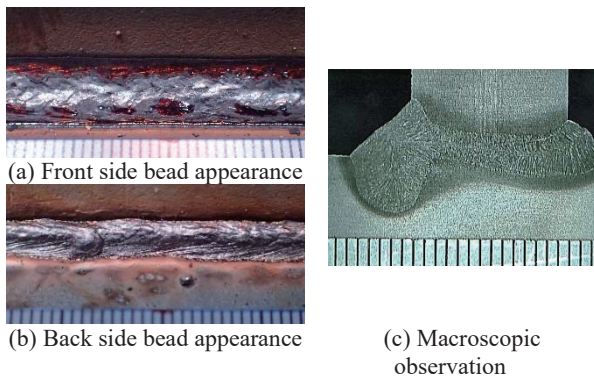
Weld bead appearance and macroscopic observation (ID: T1).
